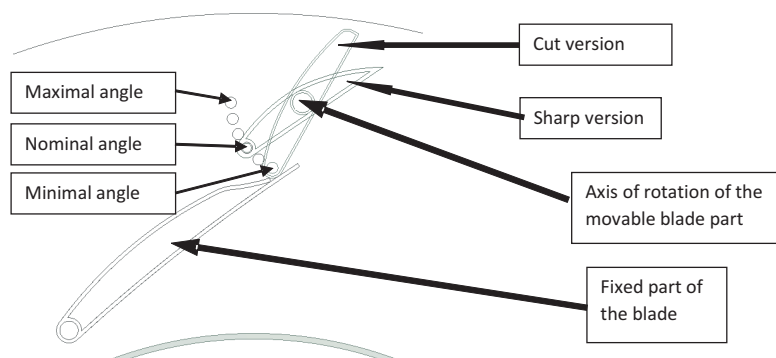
Shape and versions of the radial fan blade with a movable blade part.
